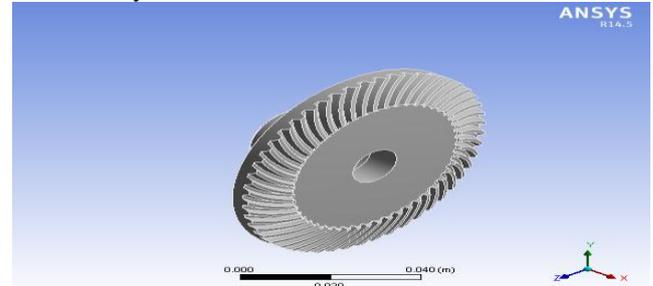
CAD model of spiral bevel gear imported in ANSYS
